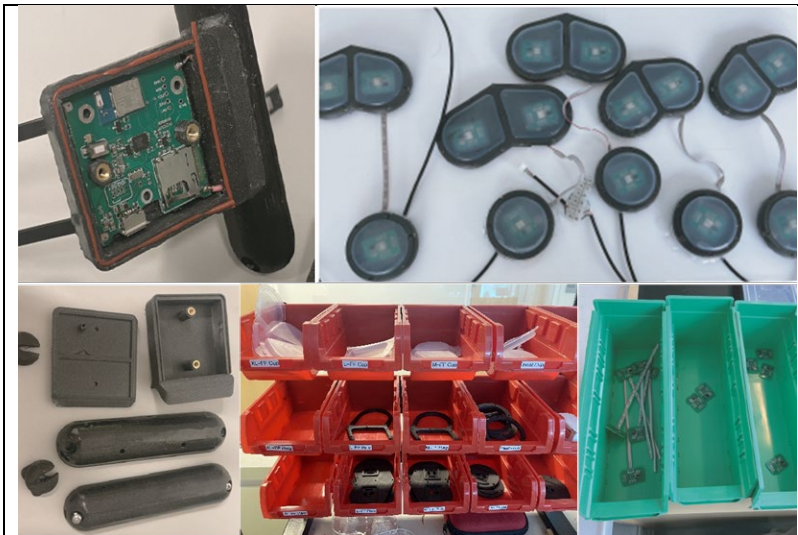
Top row: Assembled IM and completed sensors ready for inserting into custom-made subject insoles. Bottom row: IM components, insole mechanical and electronic components ready for assembly.
